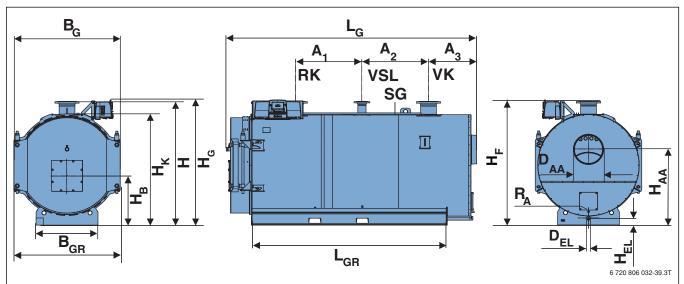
Dimensions Uni 3000 F 1400 kW and 1850 kW
